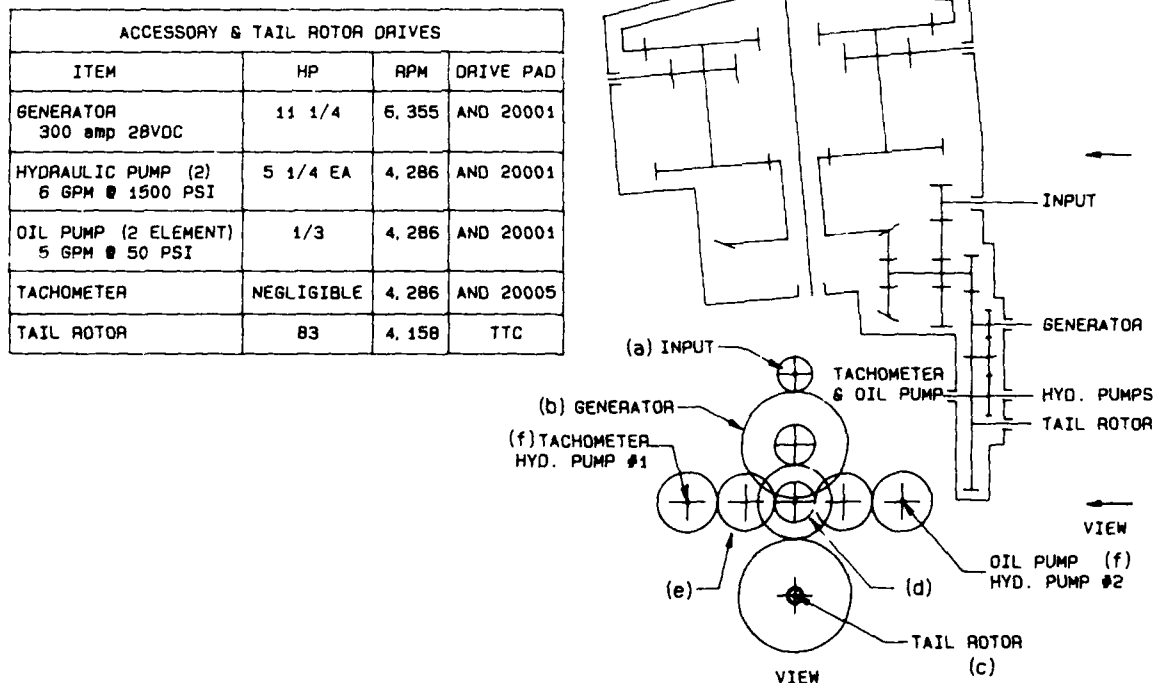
ACCESSORY AND TAIL ROTOR DRIVES
